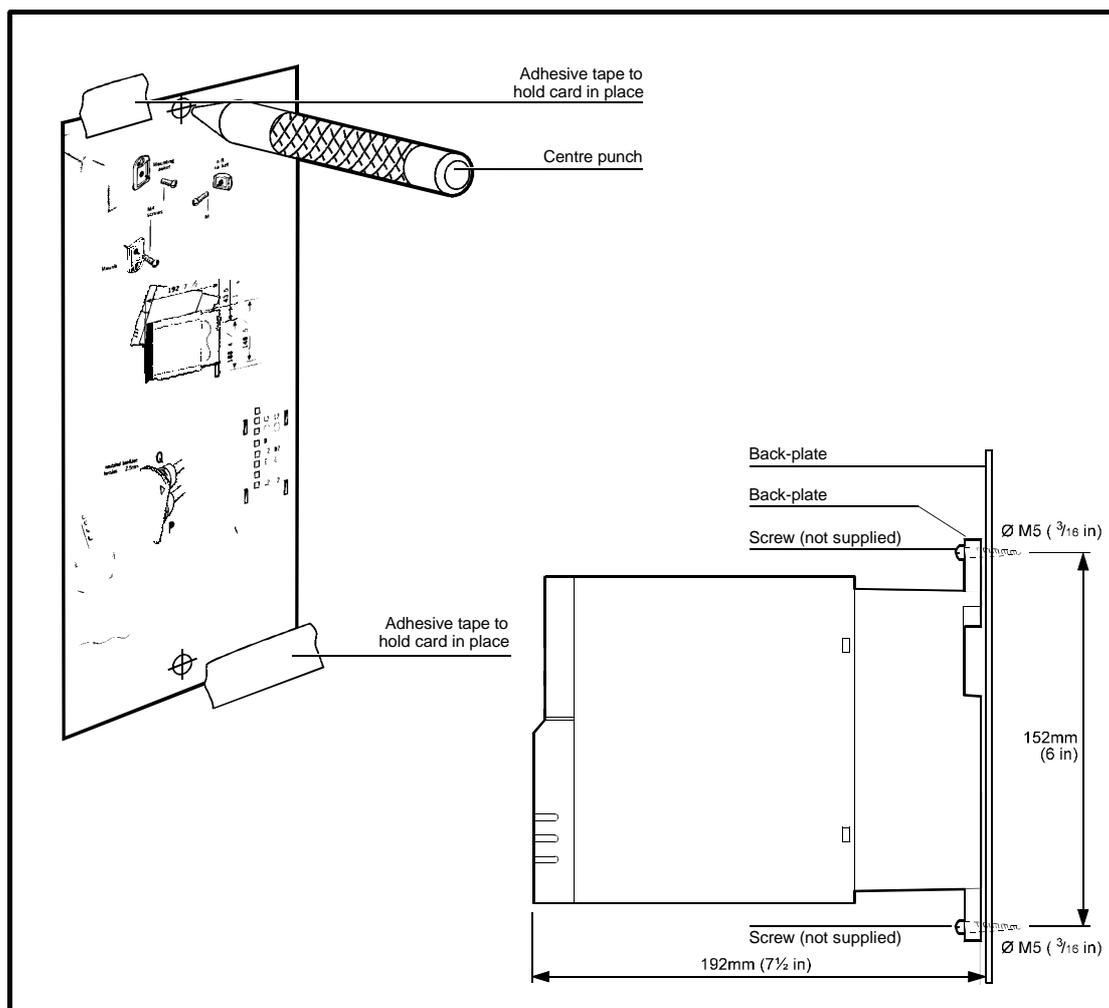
Using the RFI Filter Quick Reference Card for panel mounting the filter
